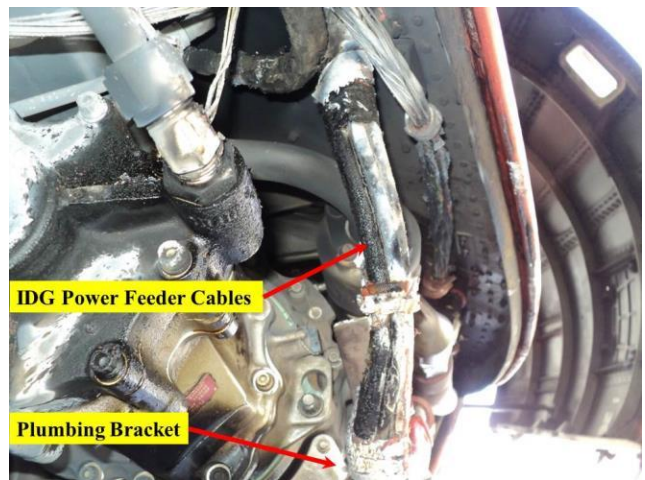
THERMAL DAMAGE TO IDG POWER FEEDER CABLES & LUBE AND SCAVENGE PUMP PRESSURE LINE SUPPORT BRACKET LOCATION
